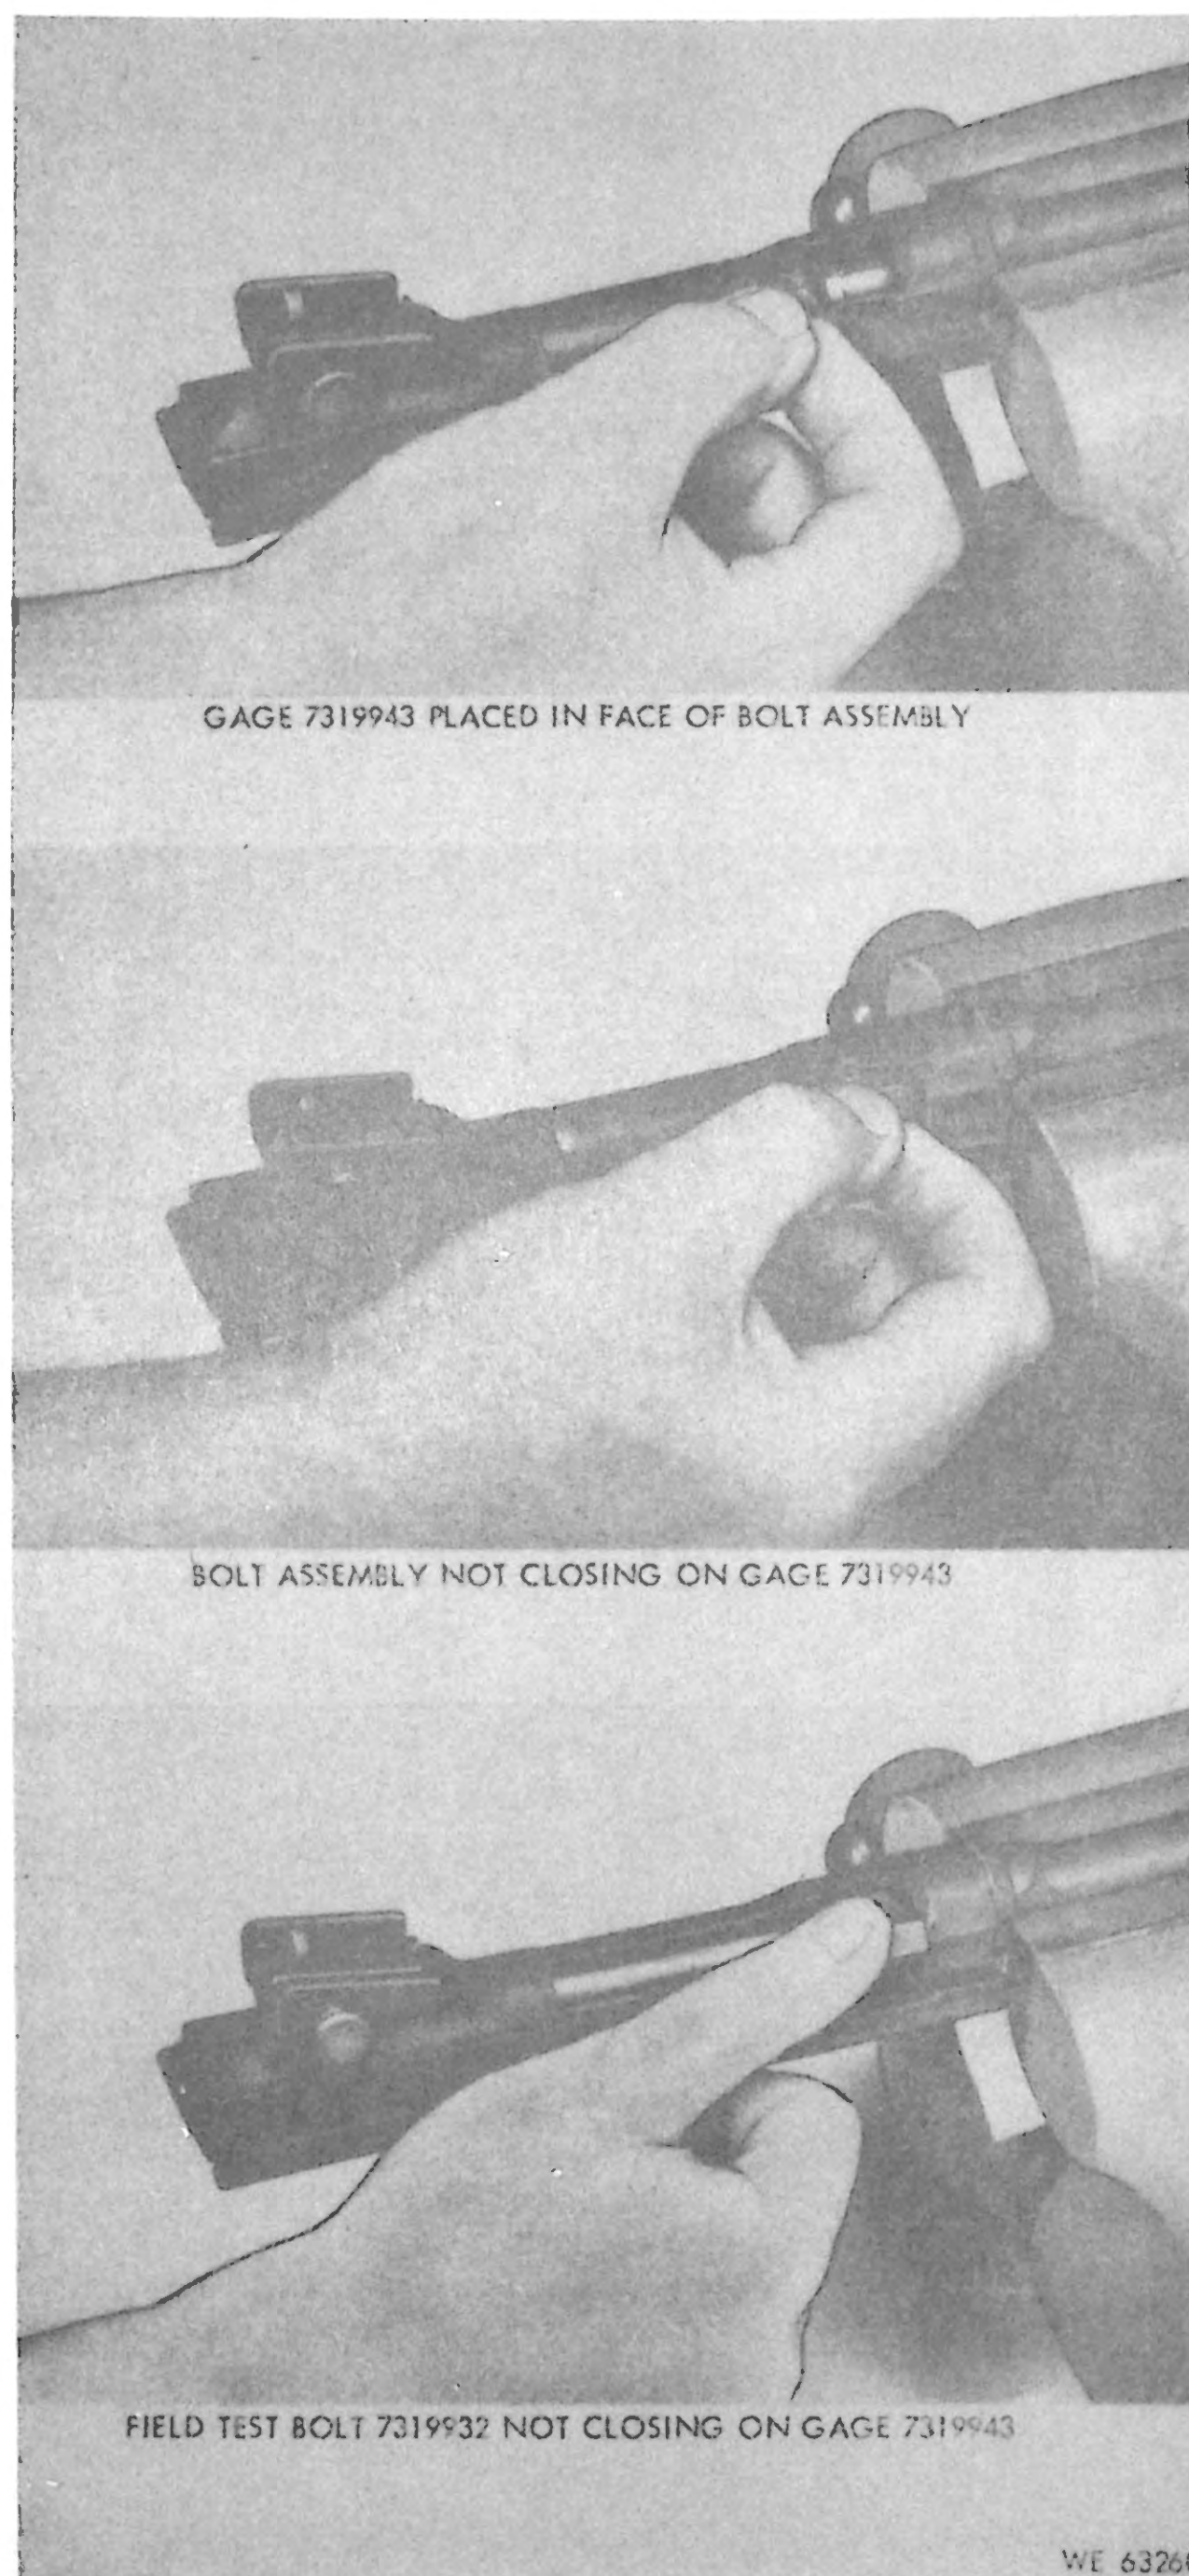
Checking headspace, using gage 7319943 and field test bolt 7319932.
